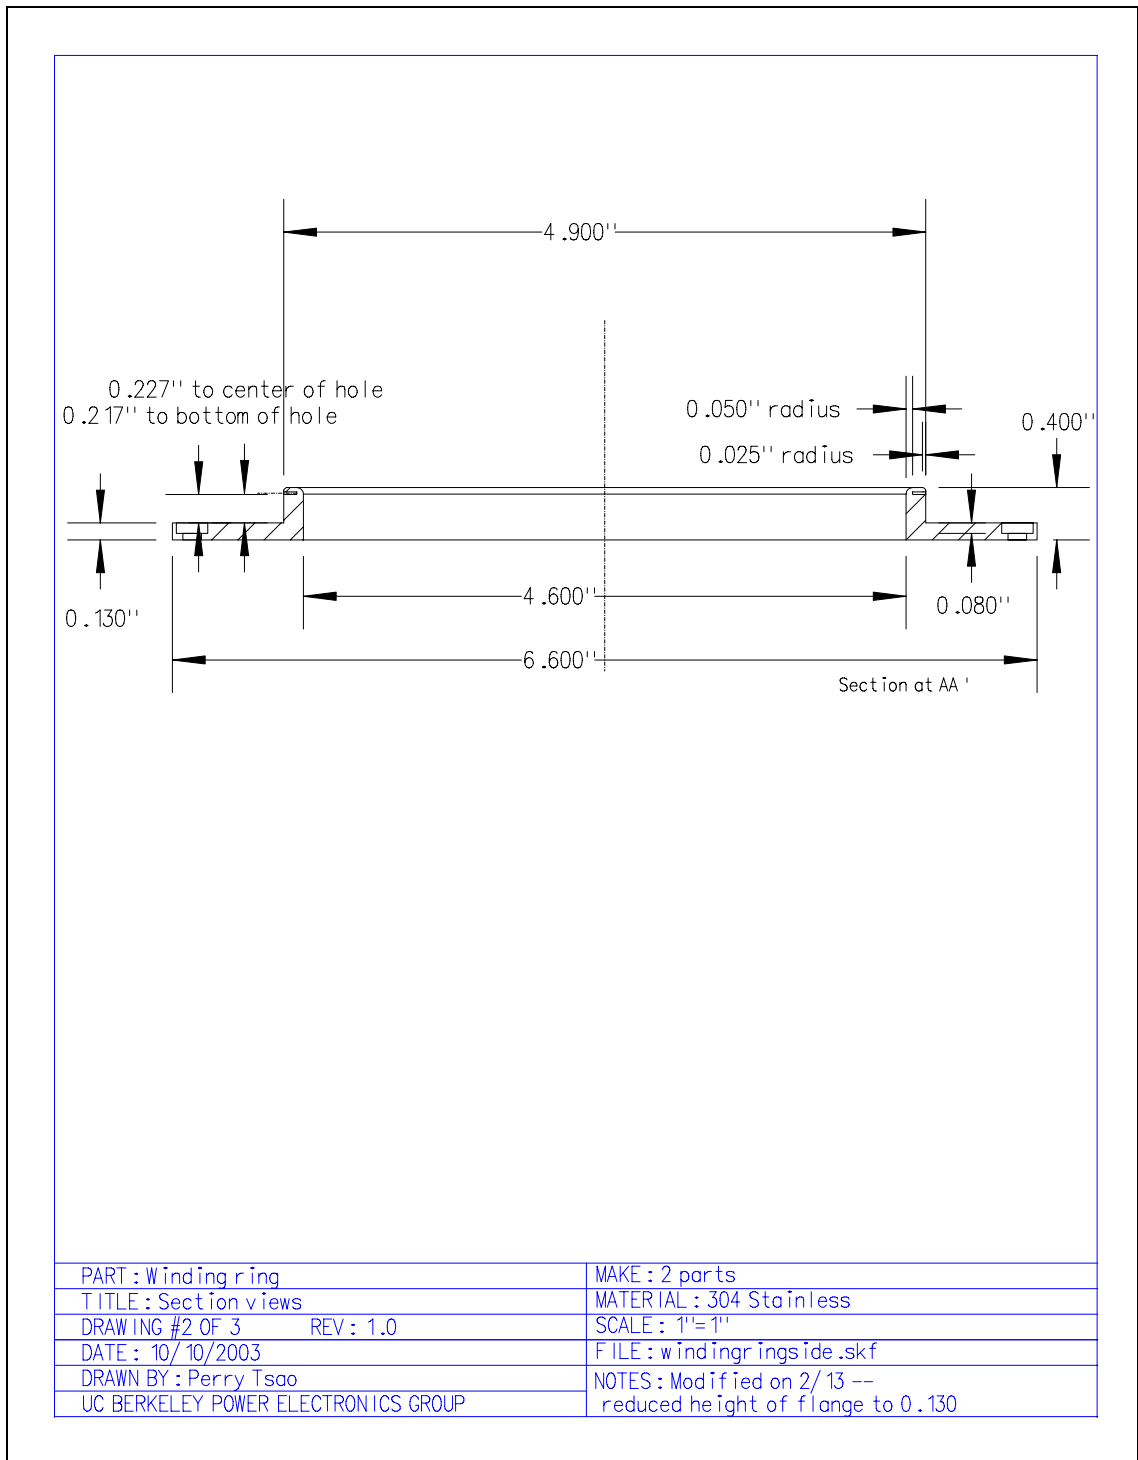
Side view of winding ring. Note that this part was later modified, and the radially oriented holes were removed when the vertical portion of the inner lip was cut off.
